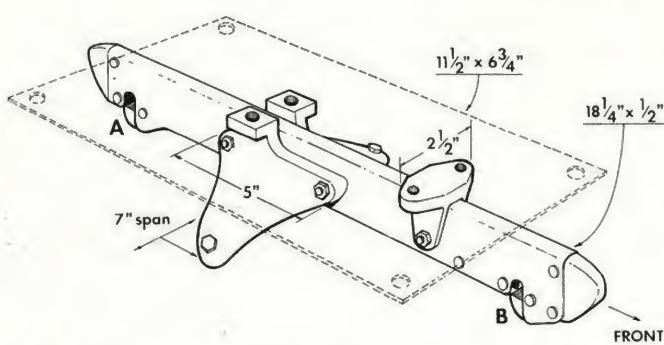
Diagram of bomb carrier (not to scale) showing underwing mounting plate (dotted line), and shackle with twin mounting points (A,B).
